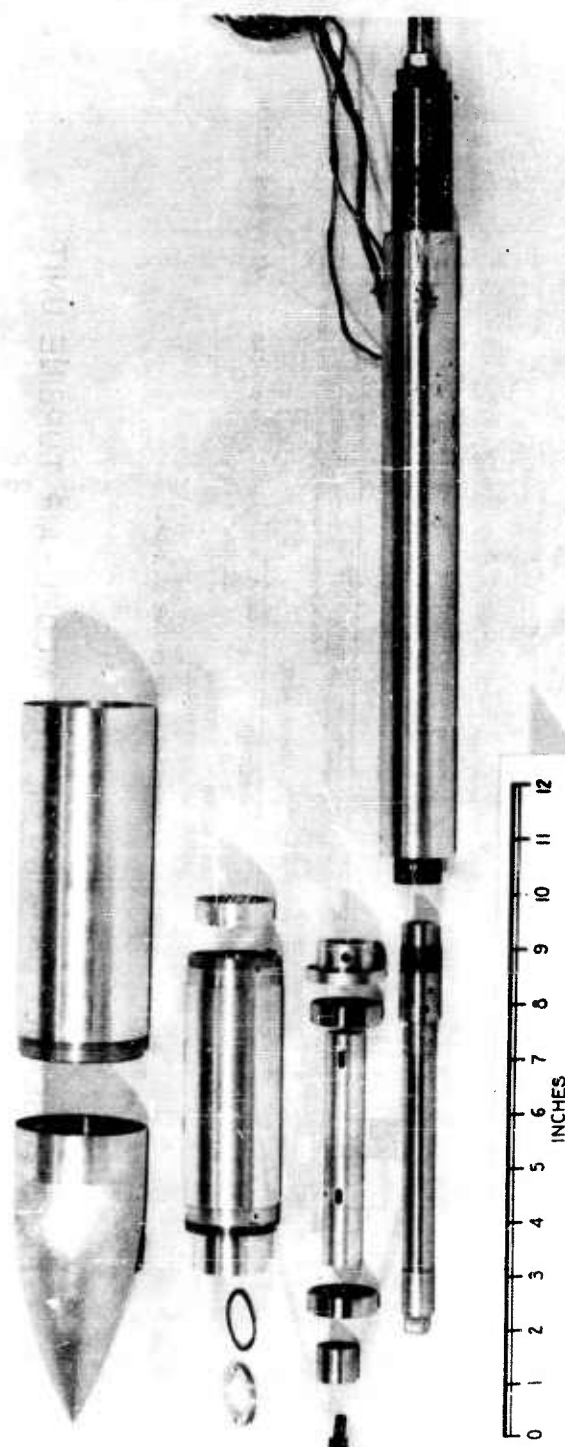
EXPLODED MODEL-AIR TURBINE UNIT
